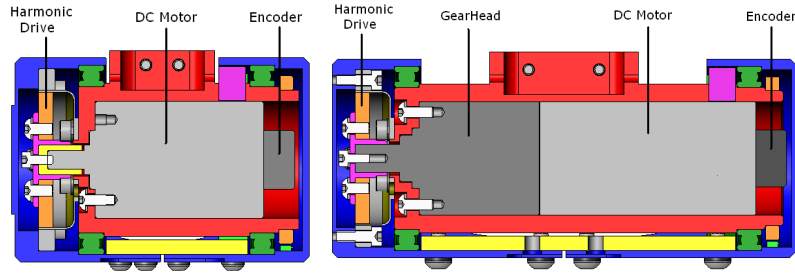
The drawing on the left side shows the parts of the small and medium modules, while the drawing on the right side shows the parts of the Large and Extra-Large modules. The main difference is the additional Faulhaber gearbox (GearHead). The green colored parts correspond to the cut of the bearings. The blue and red colored parts correspond to the black and gray parts of the renders in Figure 6
